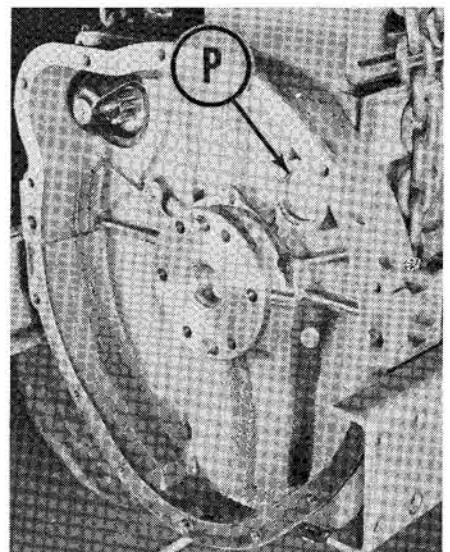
Expansion plug (P) at rear end of camshaft is accessible after removing flywheel. Plug is available in three different sizes; refer to text.
